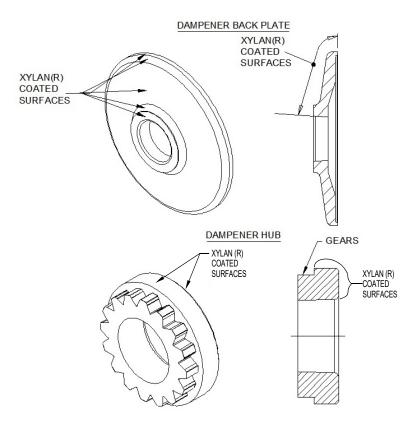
Restoration of the Blue Xylan[®] Coating on the Dampener Back Plate or Hub
